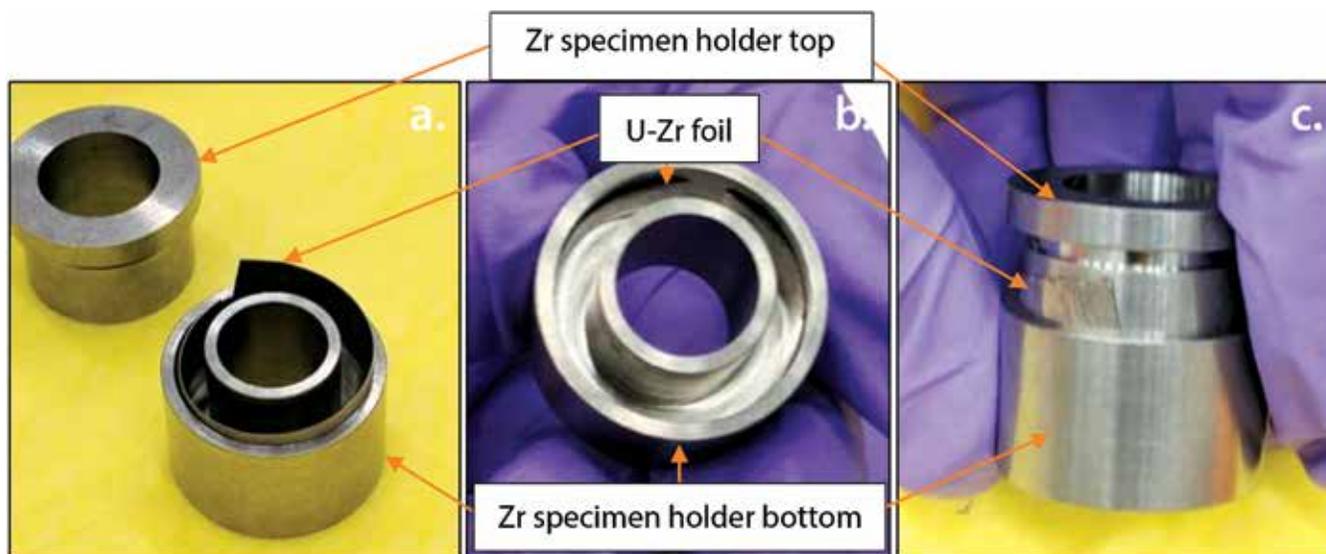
(a) Loading of a U-10Zr fuel foil into the Zr specimen holder. (b) U-Zr foil placed in bottom of specimen holder. (c) Holder top inserted prior to being welded shut for atmospheric containment. (Foil protrusion shown for visualization only.)
